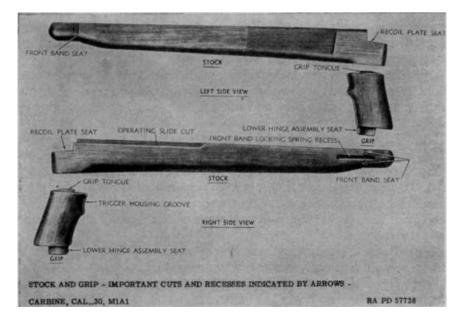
Stock and grip — carbine, cal. .30, M1A1.
